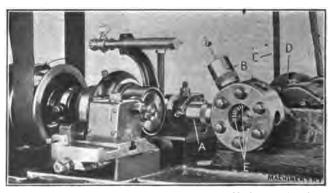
No. 2 Brown & Sharpe Automatic Screw Machine equipped with Drilling Attachment
